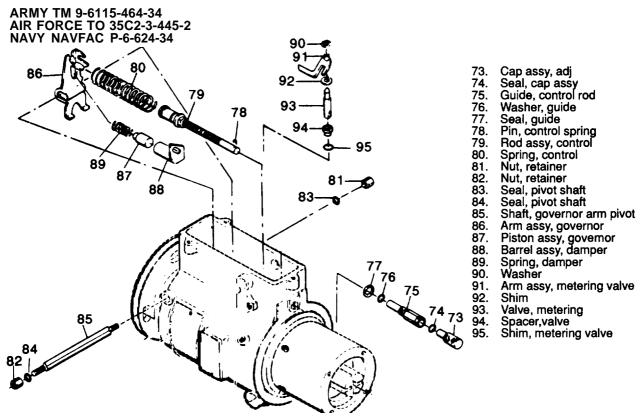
Fuel Injection Pump, Exploded View (Sheet 4 of 7)
